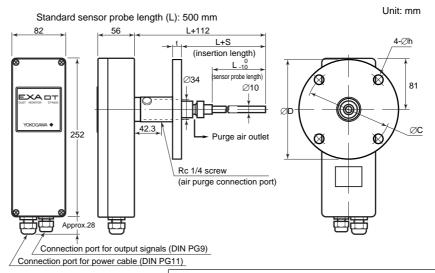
Dimensions of DT400G Dust Monitor (Welding Socket Mounting Model)
